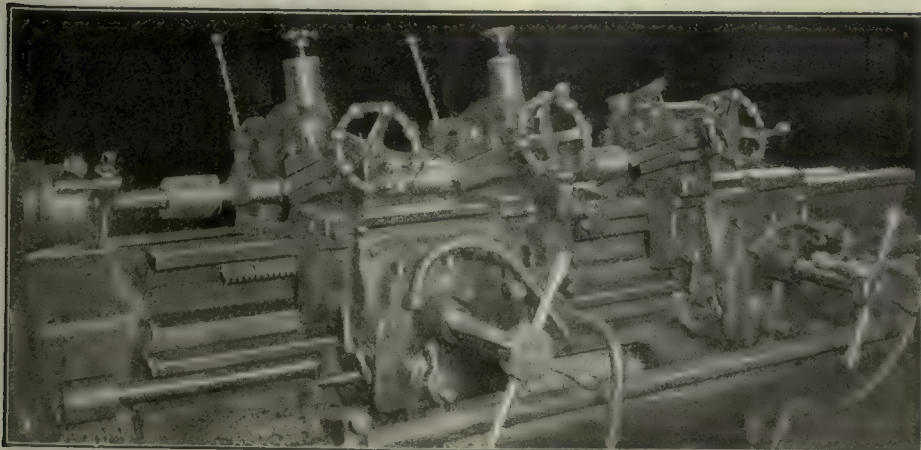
TURNING THE CAMSHAFT. FIG. 8. HOBBING THE SPIRAL GEAR
